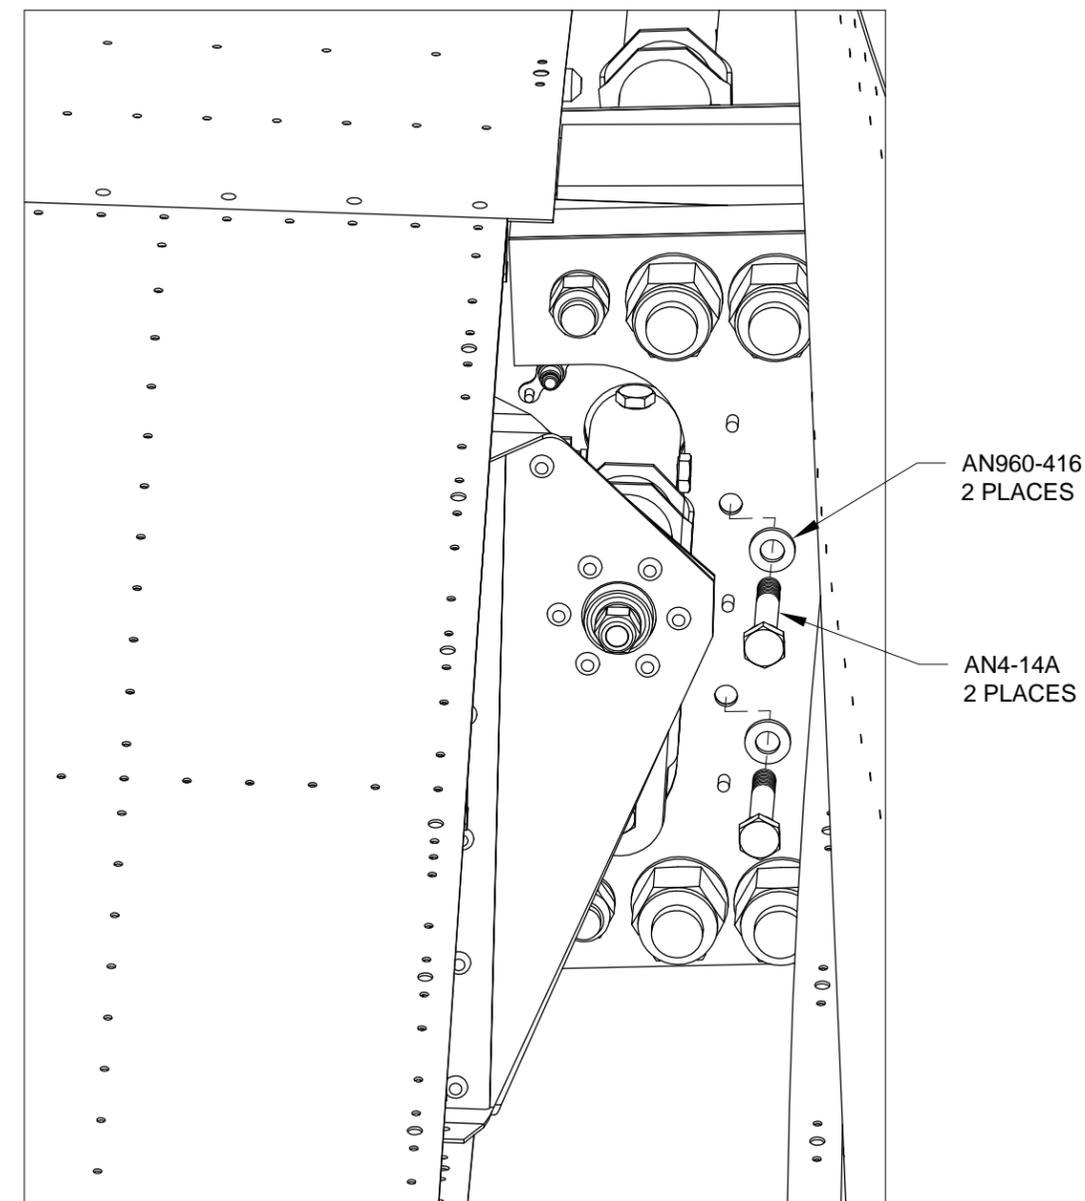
INSTALLING CENTER SECTION UPRIGHT BAR HARDWARE REAR VIEW
